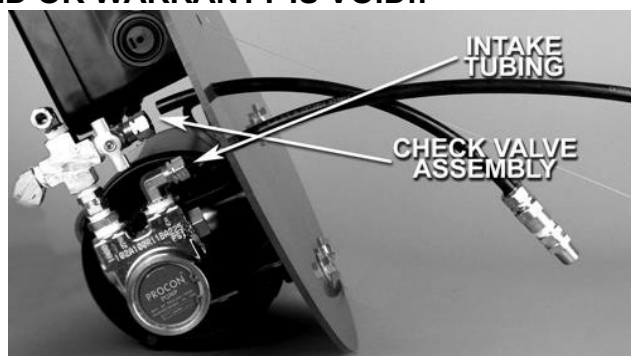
PVC Circle with Intake Tubing and Check Valve Assembly
